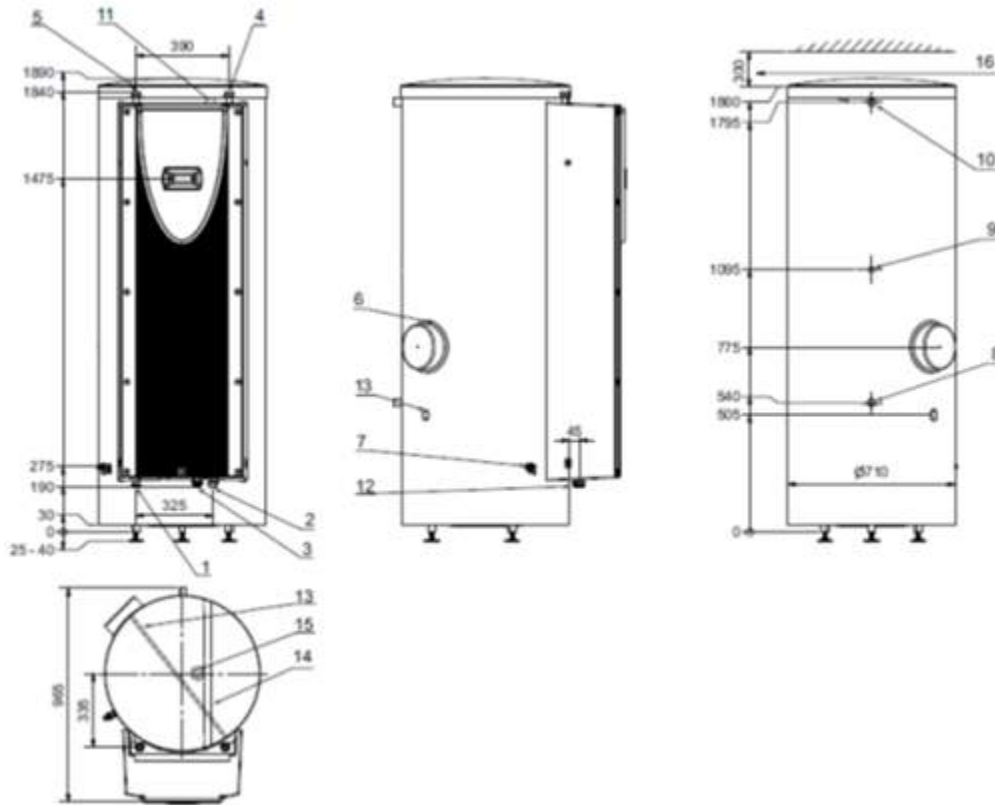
Dimensions HWK 332 (Econ5S)
